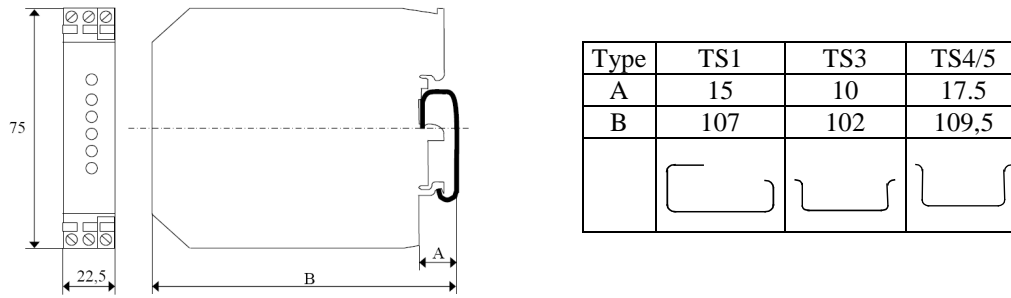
Mechanical Dimensions. The module can be directly mounted onto mounting rails corresponding to DIN 46277/1 and DIN 46227/3.
